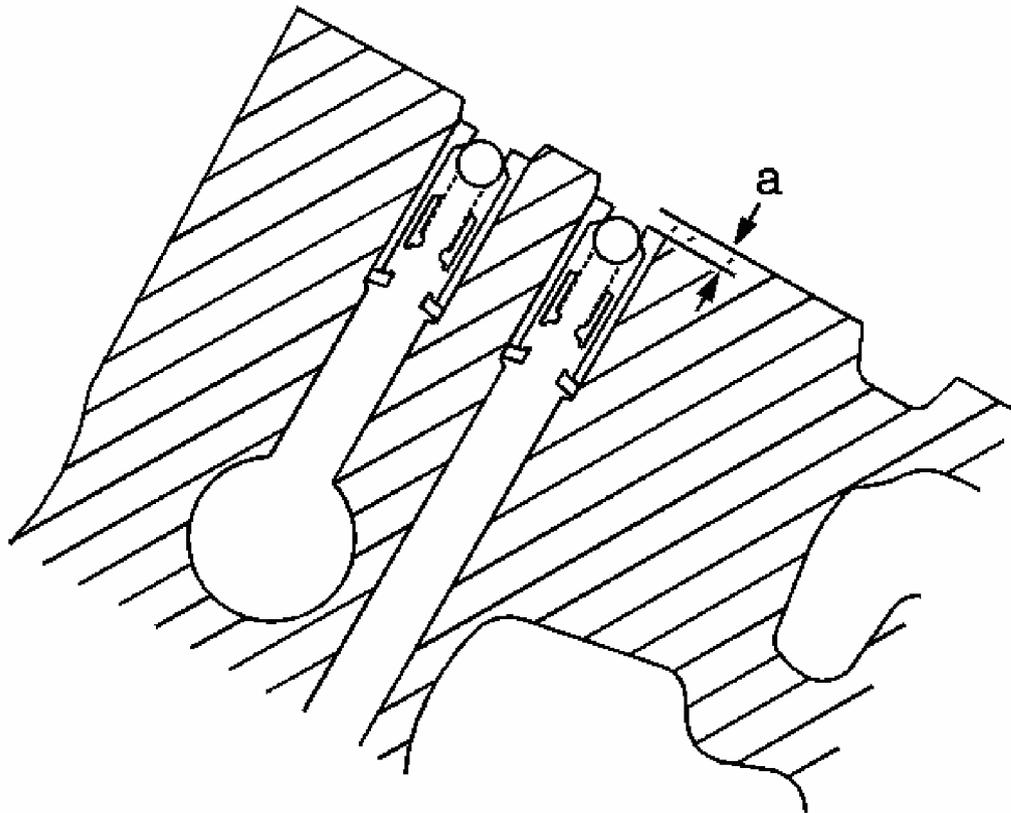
Inspecting Camshaft Position Actuator Oil Feed Check Valve
